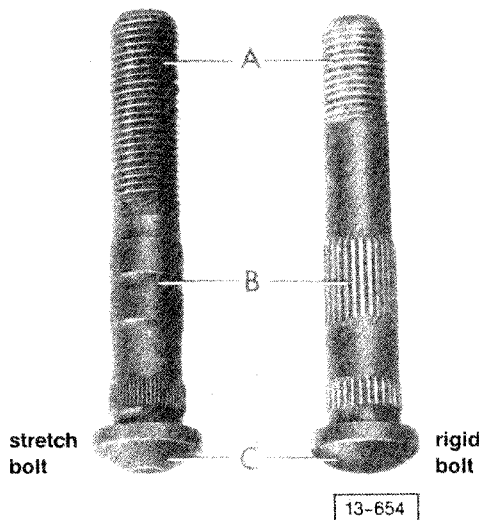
Connecting rod bolts, identification/ tightening procedure
